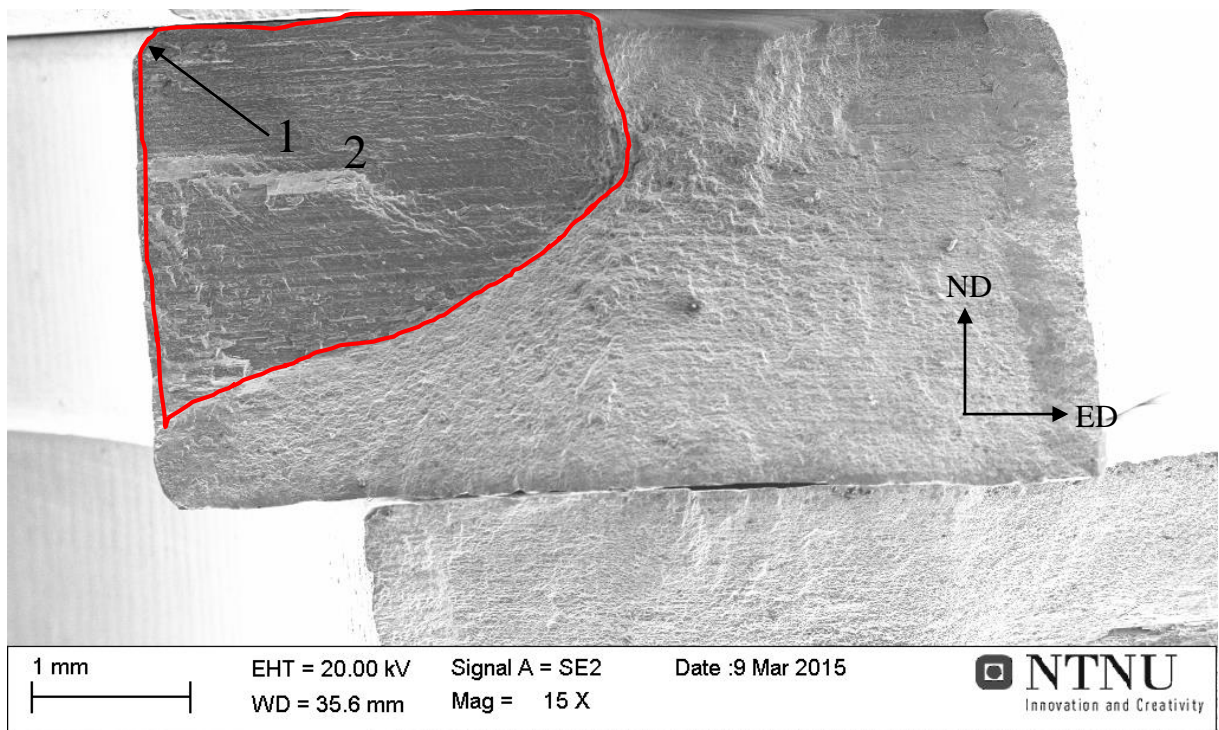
An overview of the fractured surface of AA7108 T5 with the longest fatigue life, 15X magnification. The fatigue fractured area is enclosed by the red line.
